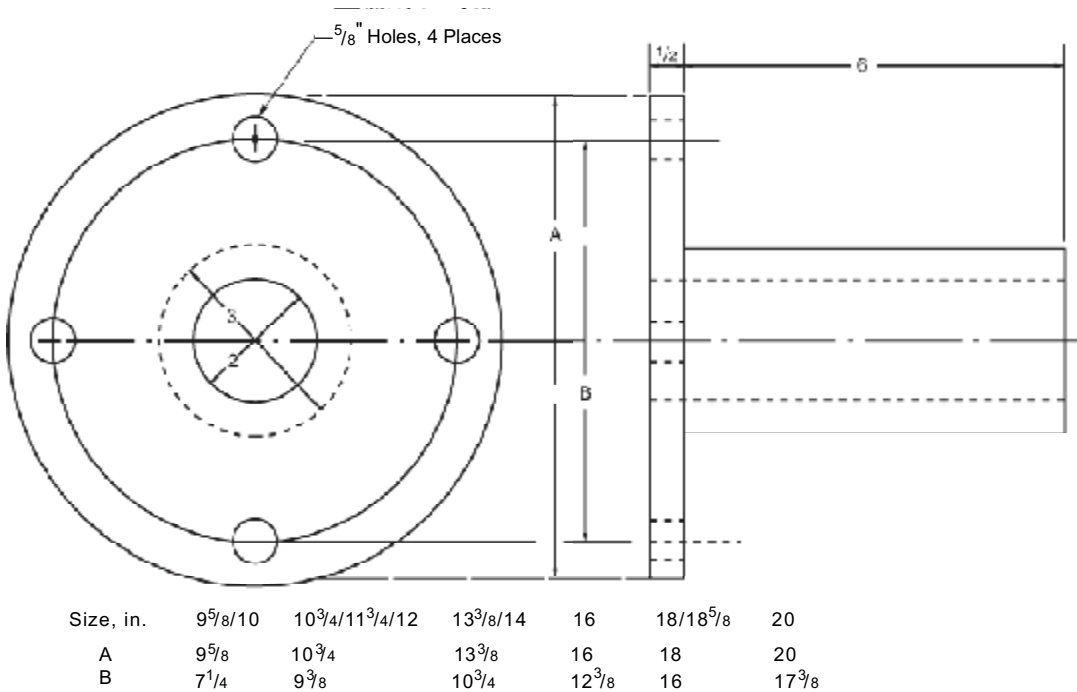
Bolt Circles and Back-Up Plate Dimensions for Line Pipe, Buttress Casing and Short or Long Round Casing Master Plug Gauges
